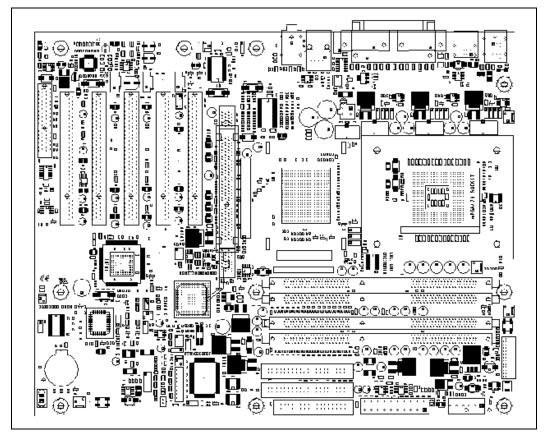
Desktop Component Placement Example (6-Layer Motherboard)
